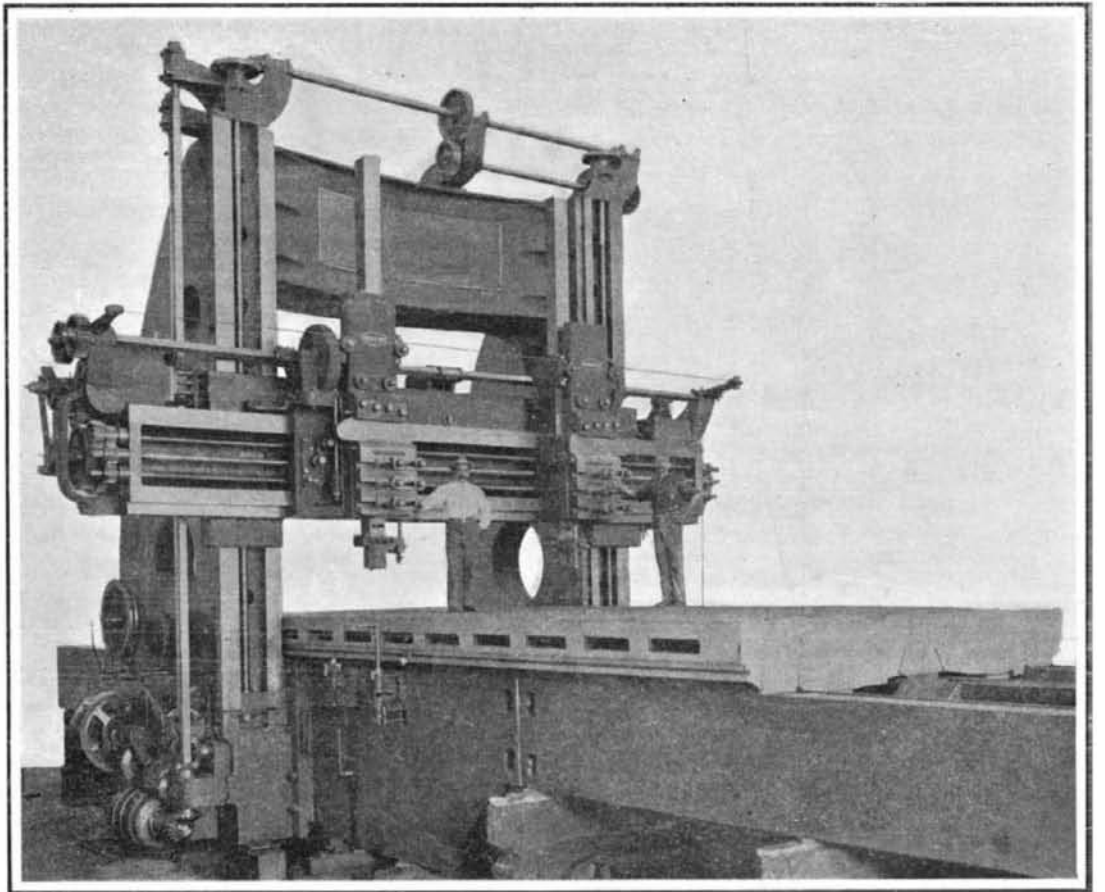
LEFT-HAND SIDE WITH MOTOR FOR SLOTTER BAR DRIVE AND PNEUMATIC CLUTCHES FOR SAME.
